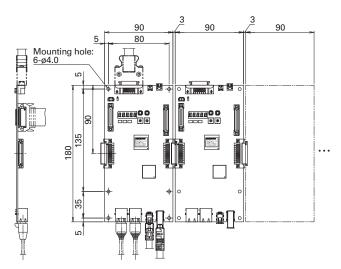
Dimensions (Single-axis EtherCAT control unit)
